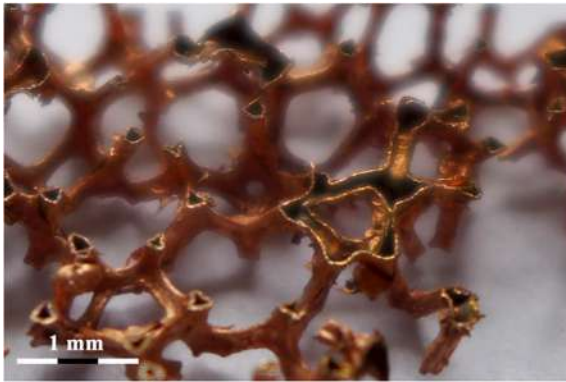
Detail view of cut-off after machining of the used 10 PPI metal foam with clearly visible hollow ligaments.
